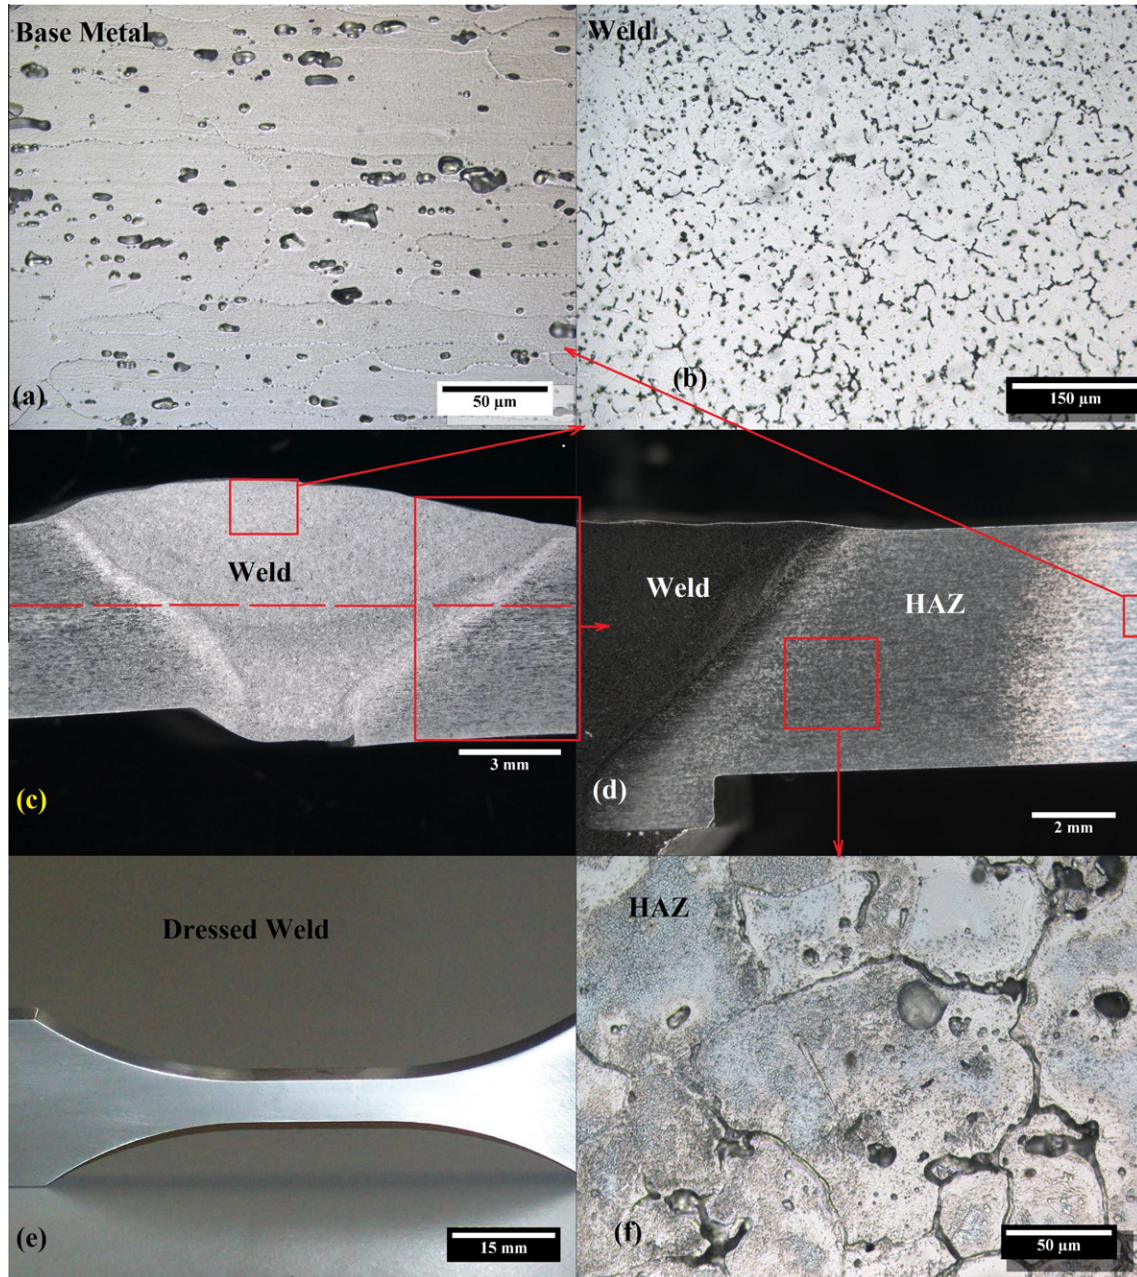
(a) Optical micrograph of the 6061-T651 aluminium base metal microstructure; (b) optical micrograph of the 6061/ER5183 weld metal microstructure; (c) and (d) macrographs of the 6061/ER5183 welds; (e) dressed fatigue specimen of a 6061/ER5183 weld; and (f) HAZ microstructure.
